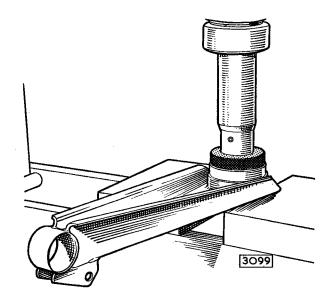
Showing removal of radius arm bushes (Churchill Tool No. J.21)
